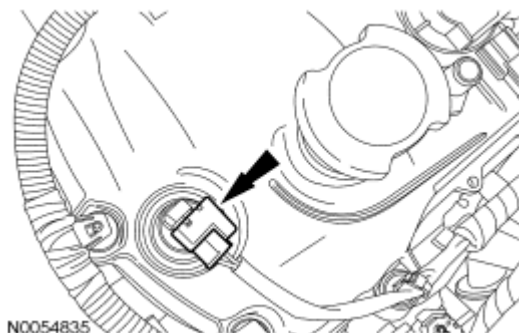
Locating LH VCT Solenoid Electrical Connector
